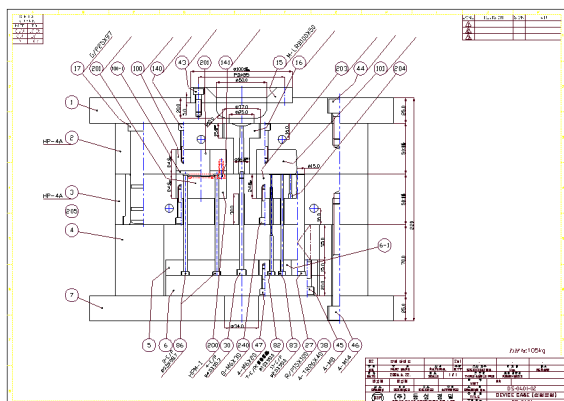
Two dimensional drawing of injection mold for the presented protein chip model
